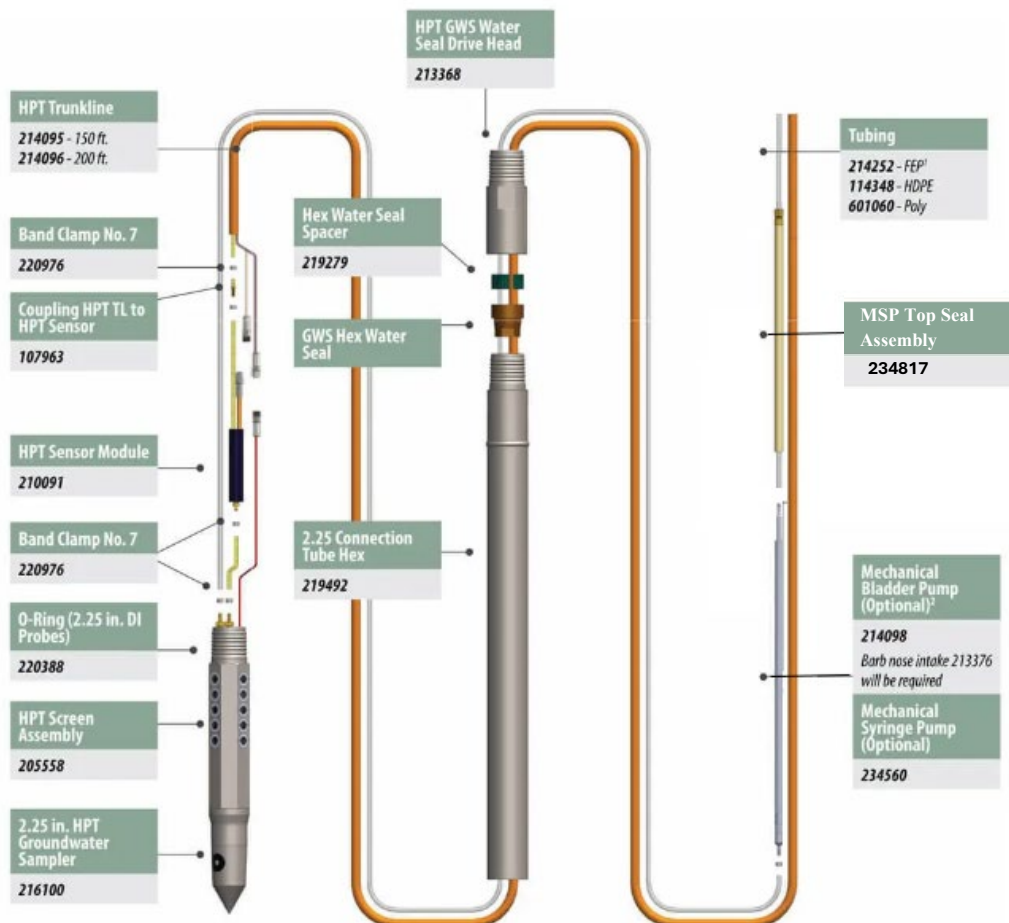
2.25 HPT-GW Sampler Tool String Diagram
